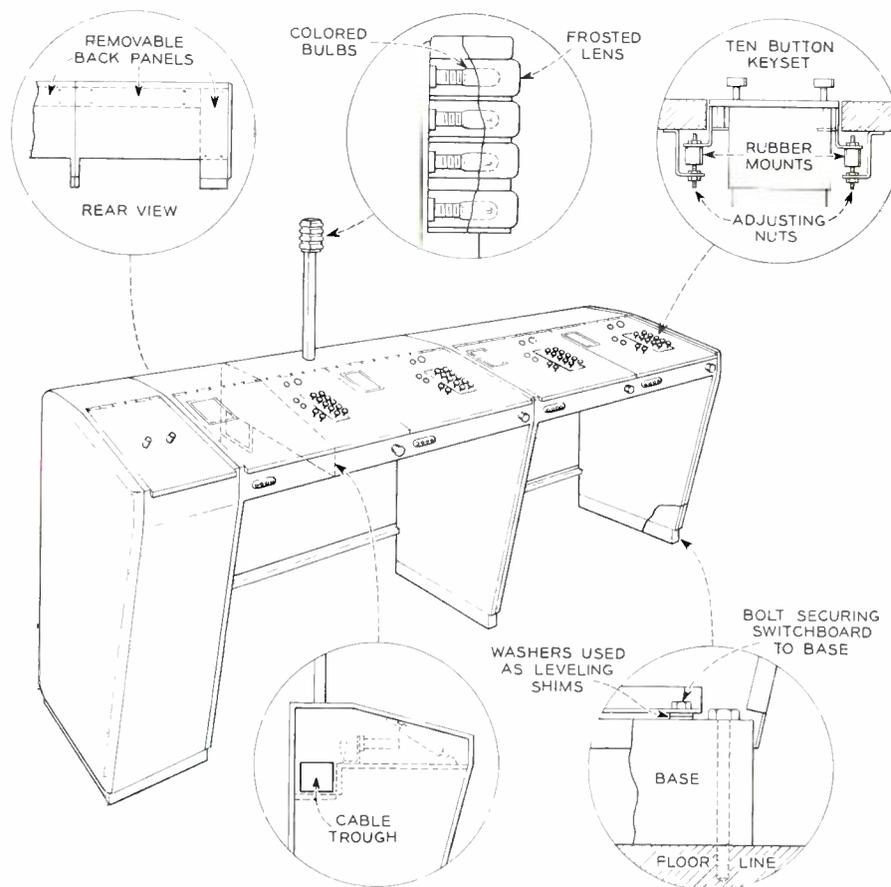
Drawing of switch-board sections and cable-turning section showing details of construction.
